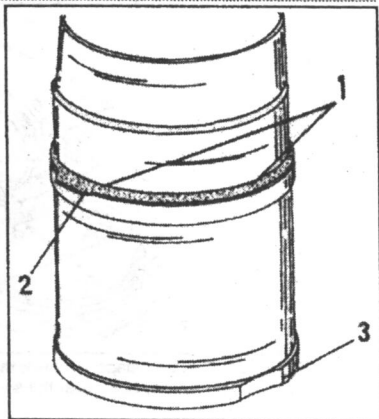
View of a cylinder liner with the fitted seal. Refer to text.
